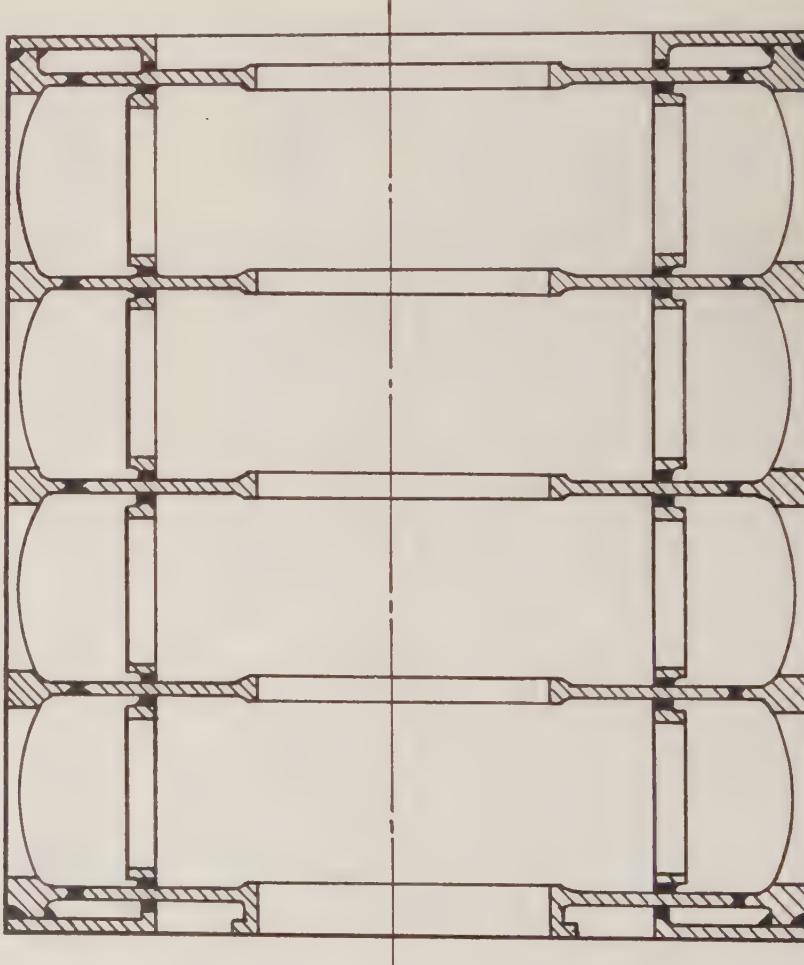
The fabrication of the crankcase is completed after three major welding operations have been performed. The first operation is the submerged-arc welding of the stress member sub-assemblies to the inner deck sub-assemblies. These two sub-assemblies constitute the stack-up sub-assembly. The four outer deck sub-assemblies are then submerged-arc welded to the stack-up sub-assembly. Lastly, two flat end plates and filler plates, which frame the top and bottom edges of the large rectangular openings in the crankcase, are manually arc-welded to the completed assembly.
